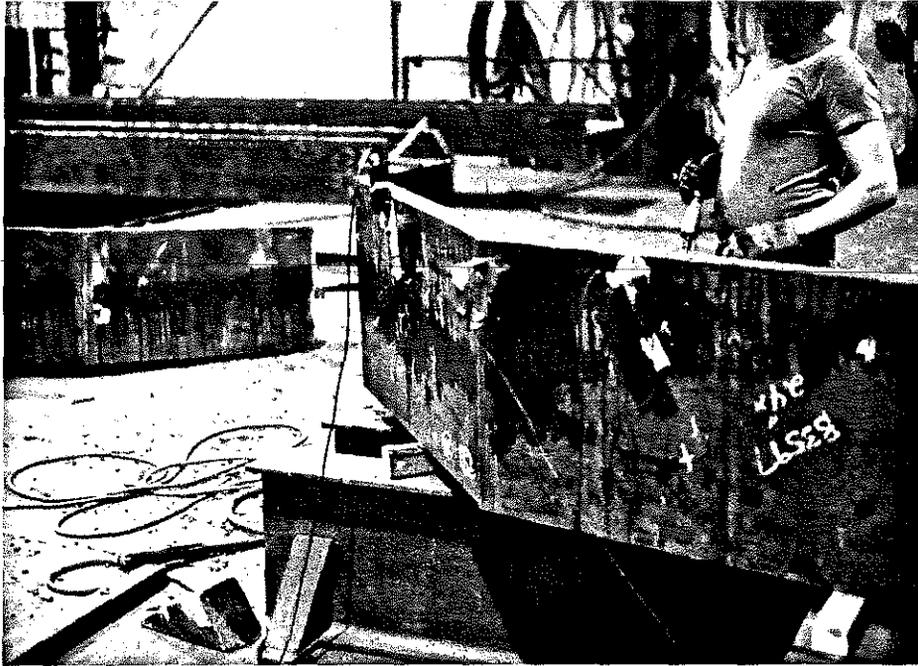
AE Transducers Mounted to Monitor a Corner Weld (Note the Centrally Located Pulser Used for Calibration).
